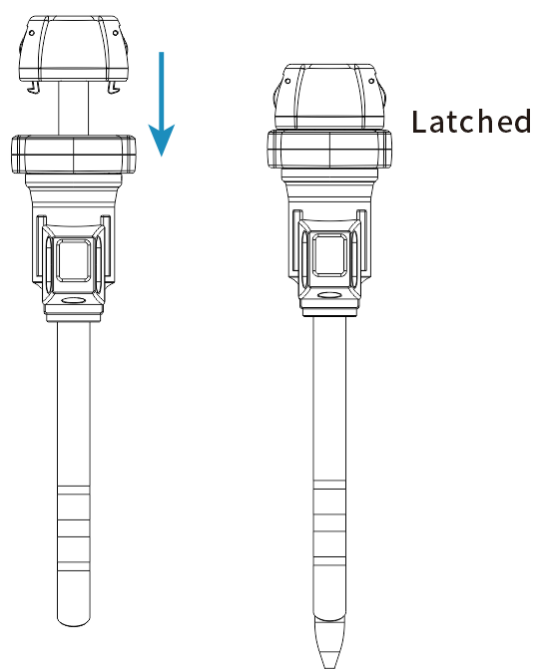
Obturator, Cannula Seal and Cannula Assembly
